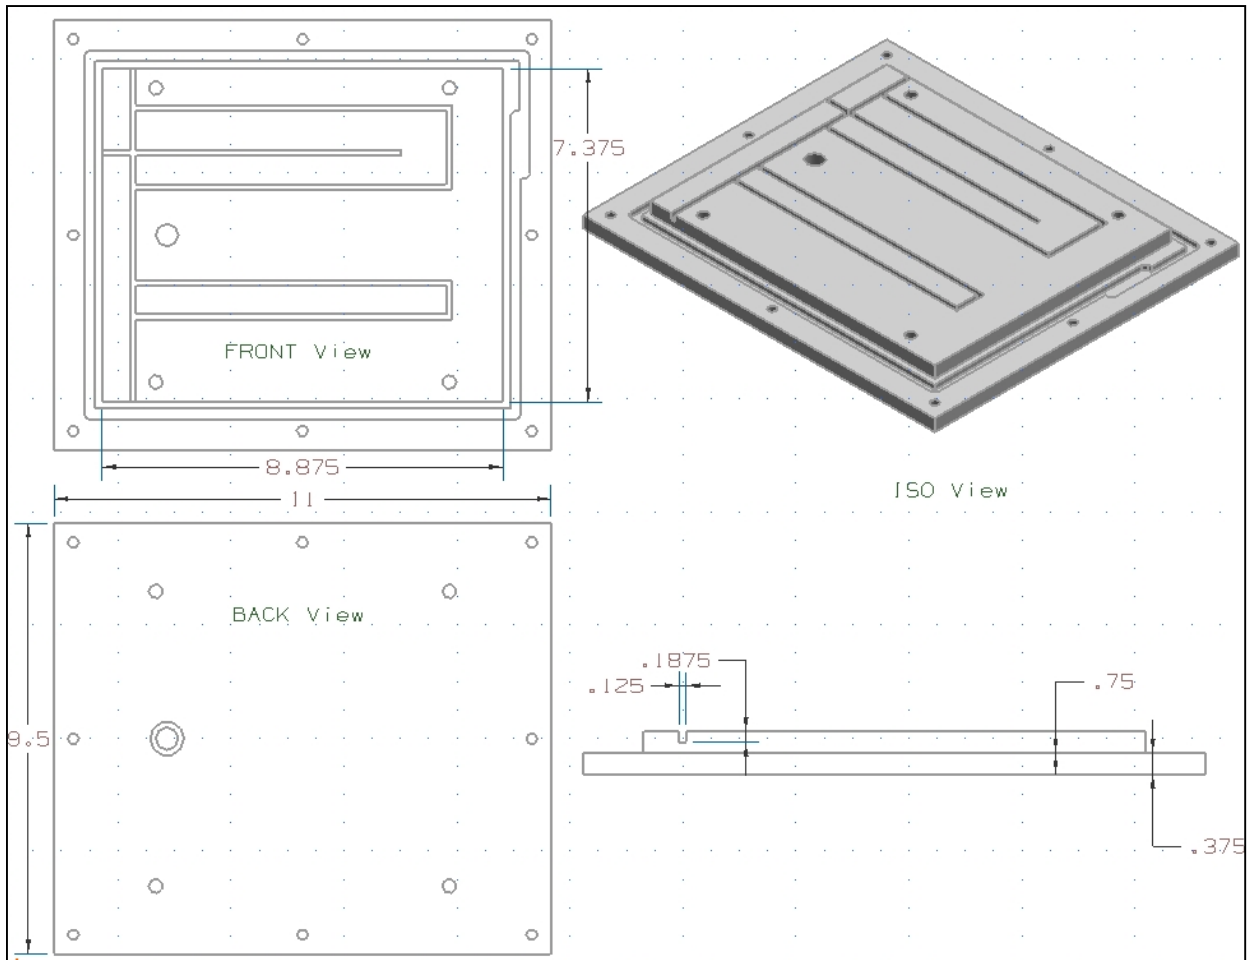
FRONT, BACK, ISO, and RIGHT view of Back Combustor Plate
